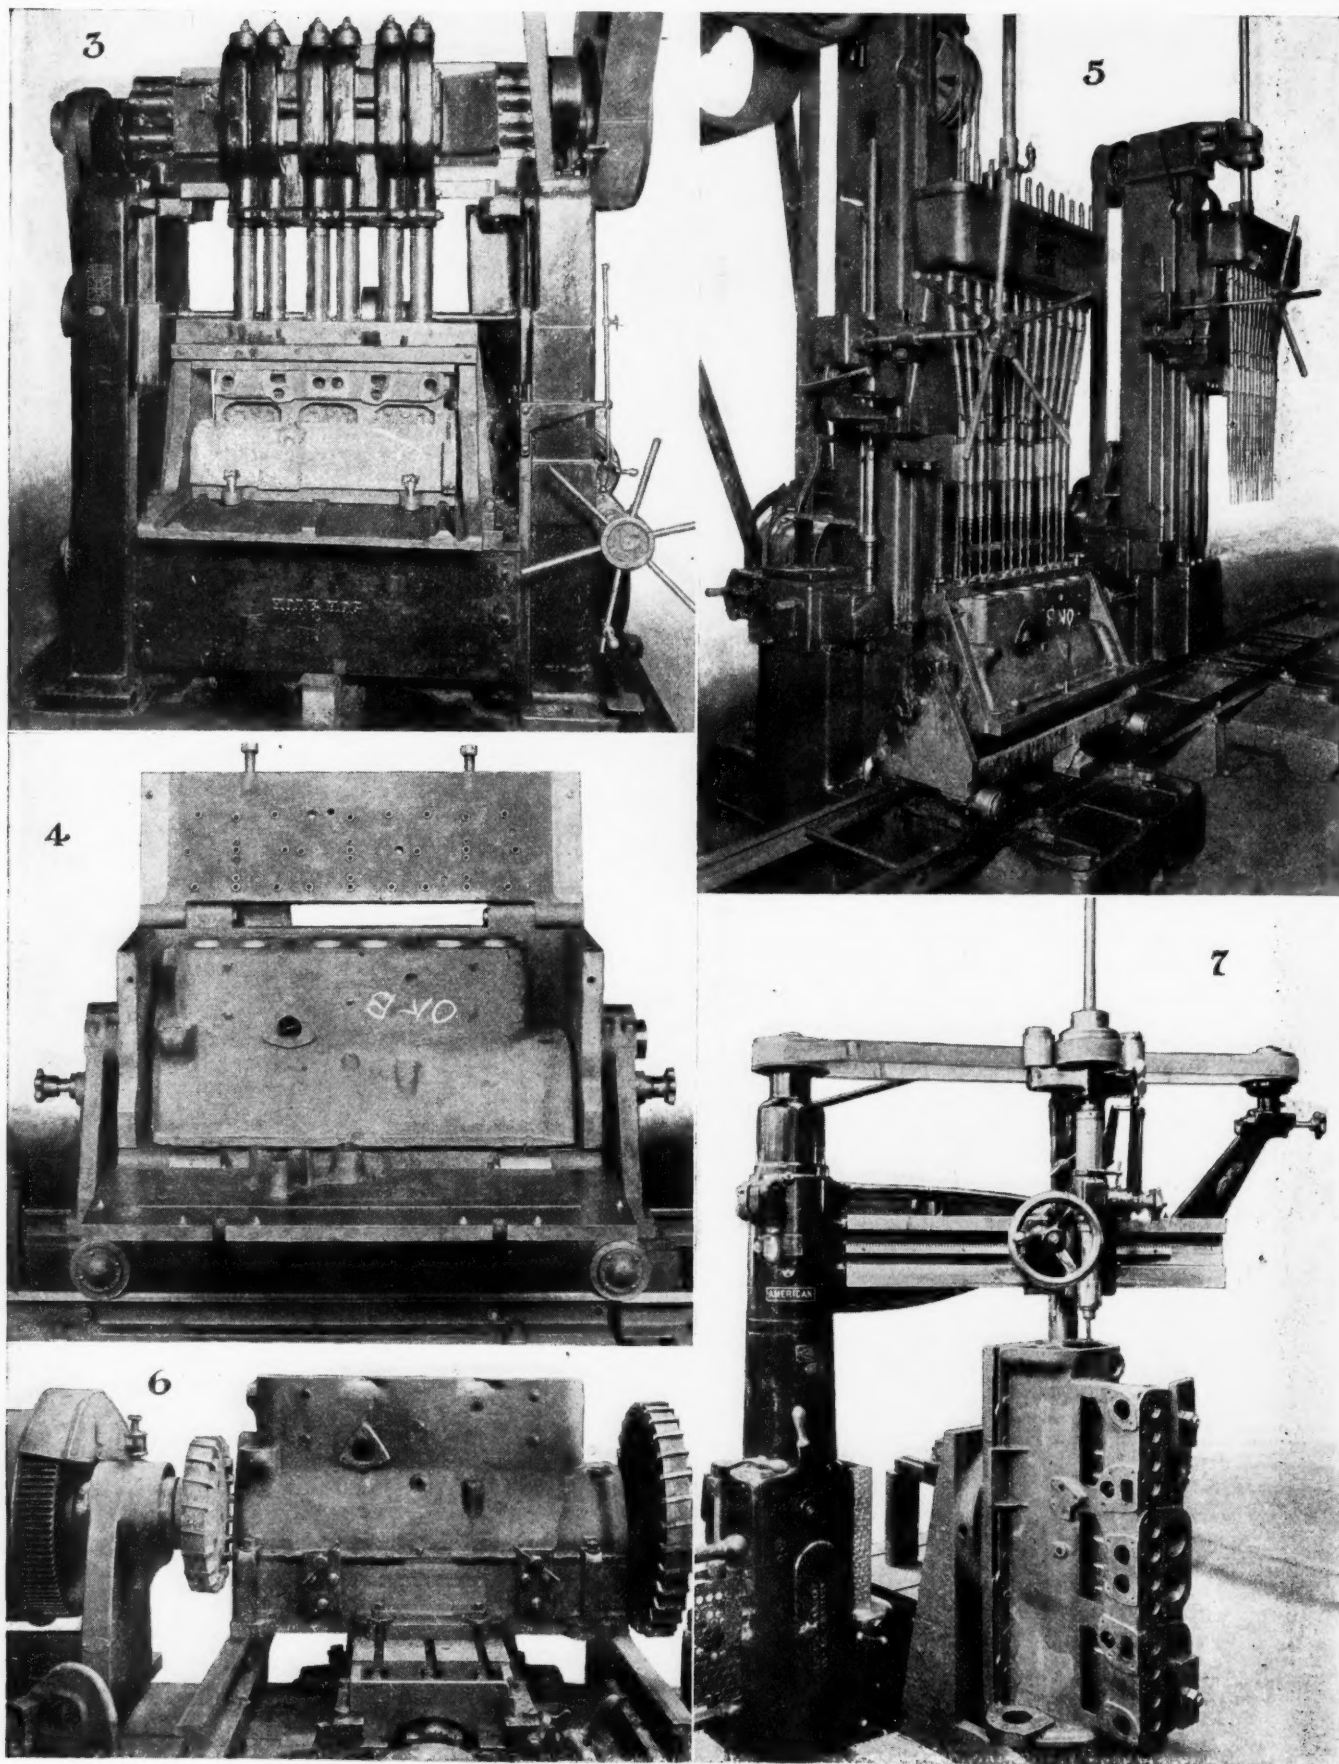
Boring cylinders in six-spindle Moline Hole Hog. Fig. 4—Tumbling type of box jig used for operations in railroad gang drill. Fig. 5—Two-unit gang drill for operations on valve seats and valve stem guides. Fig. 6—Facing off end flanges in Beaman & Smith miller. Fig. 7—Reaming dowel hole in end flange in American radial drill.
